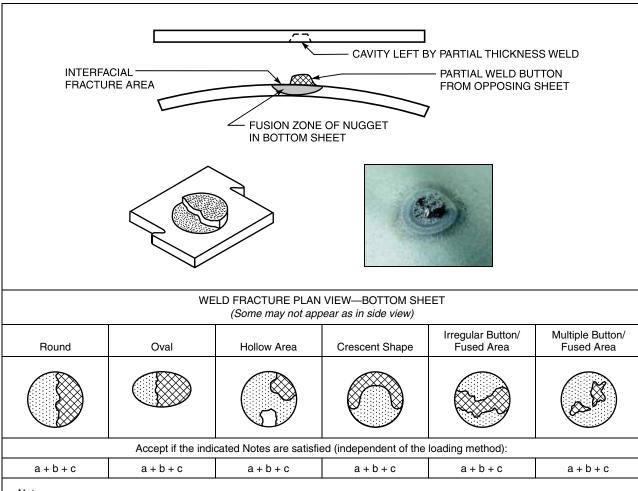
Fracture Mode 4—Interfacial Fracture with Button Pull and Partial Thickness Fracture
